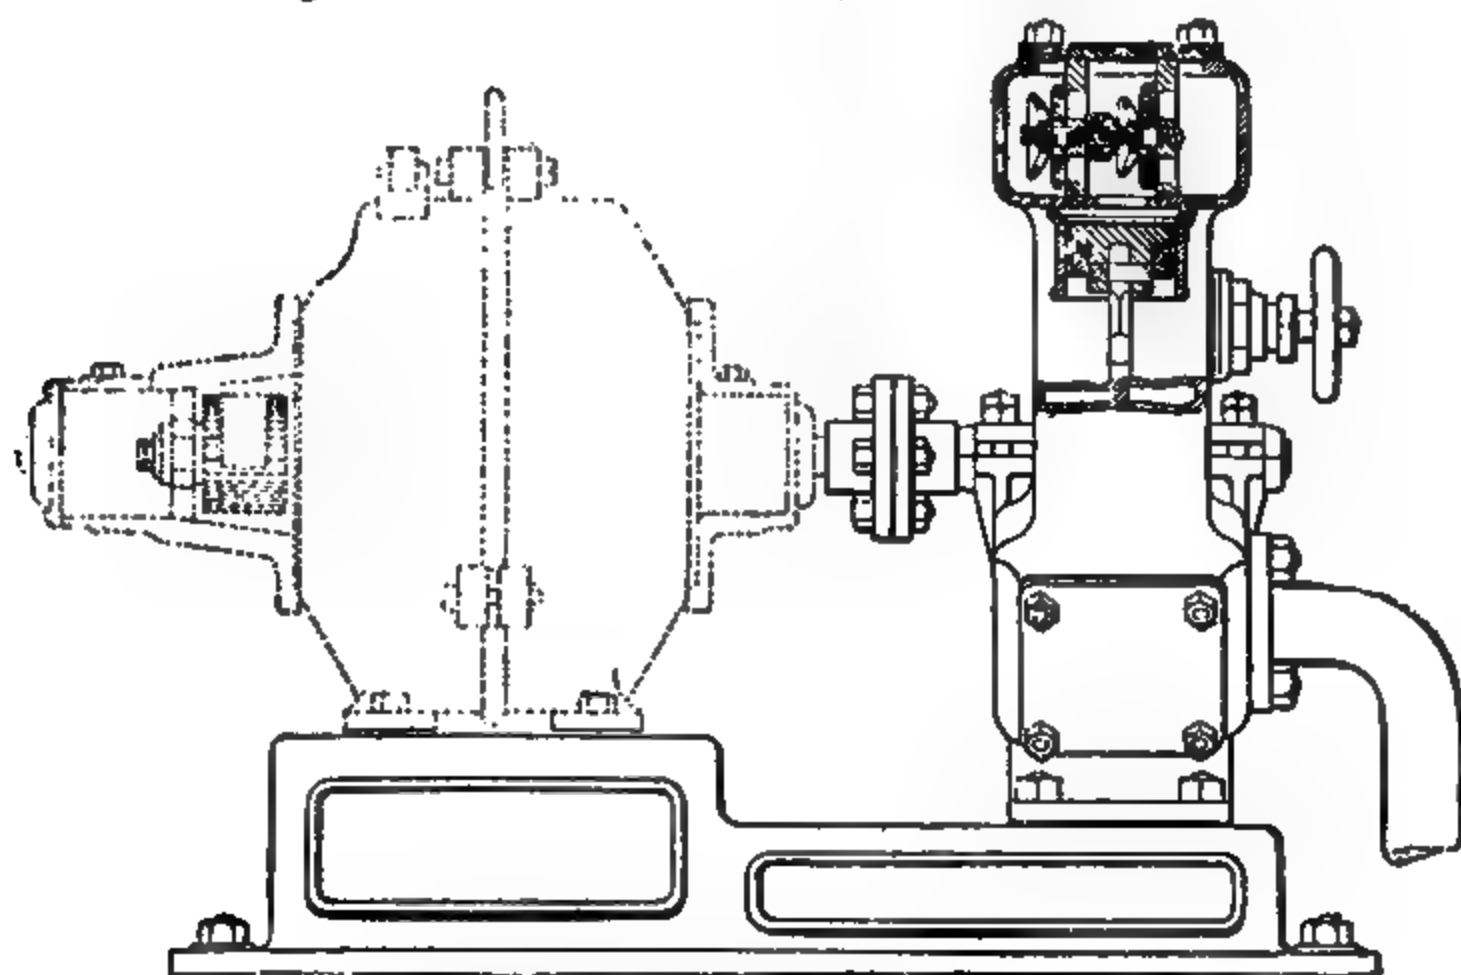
Part Sectional Elevation, showing Arrangement of Plungers and Valves in an Electrically-driven Hatfield Fire Pump.
